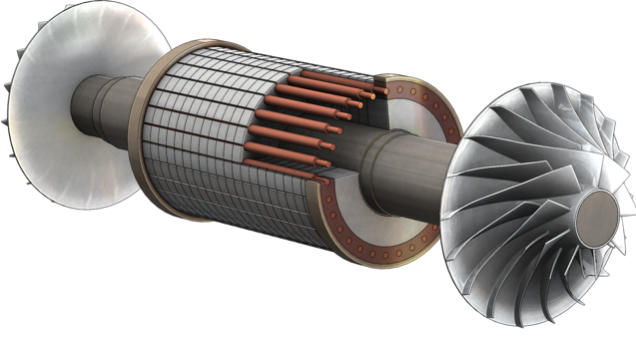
Thick-laminate rotor cross section with a shaft collar on one end and a lock disk or end plate on the other.
